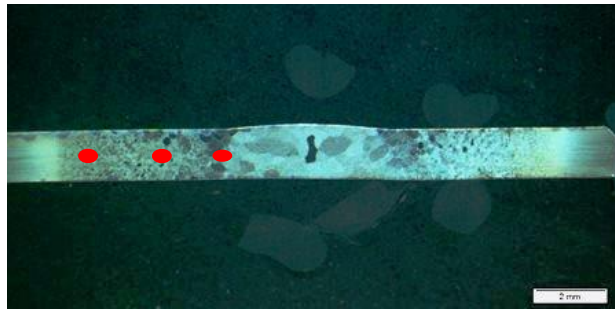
T8 Weld cross section performed at a  $7.54 \times 10^{-3}$  (m/s) welding speed and 54.7 J/mm heat input, showing the three radial points with distances of 0.5, 2 and 5mm from the fusion line. Stereoscopic image at 85X magnification
